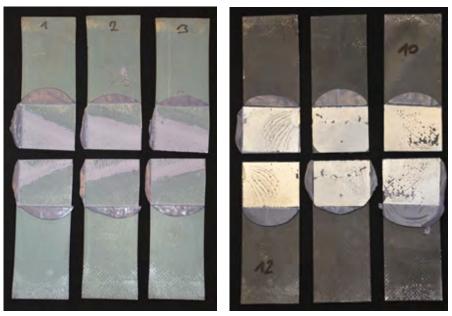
Adhesive-bonded specimen after the shear strength tests: a) specimens made of steel HC340LA and b) specimens made of steel 22MnB5
